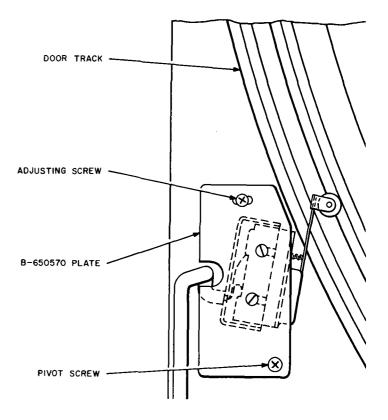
B-650626 Door Operated Micro Switch Assembly
